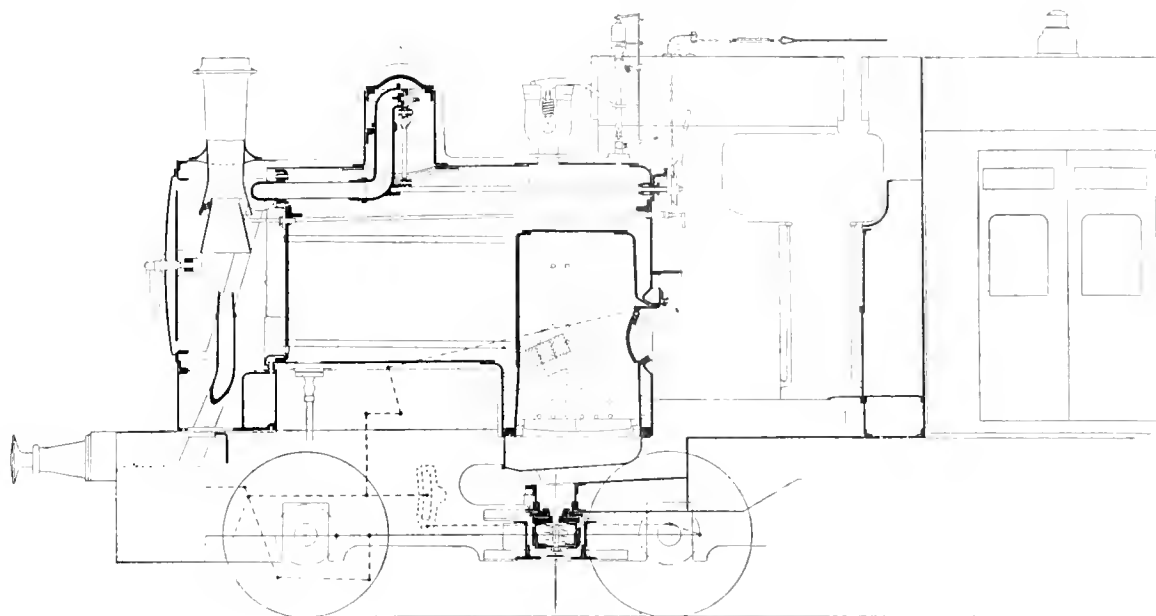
SECTION OF MOTOR TRUCK AND BOILER, LANCASHIRE & YORKSHIRE MOTOR CAR.
